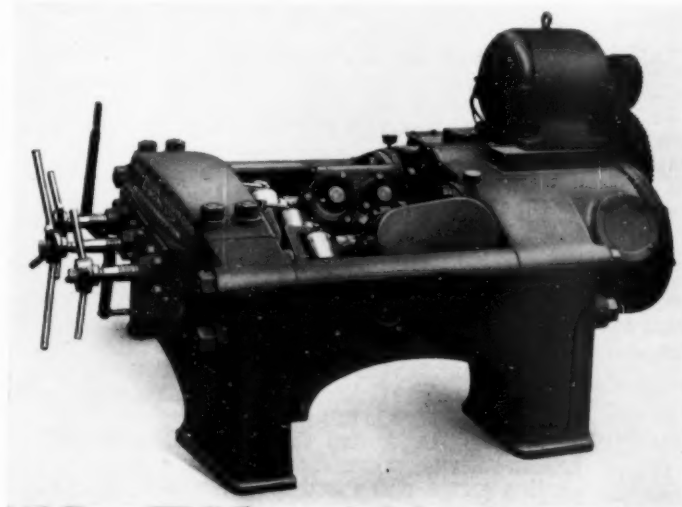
A small straightening machine with axially adjustable driving rolls.
